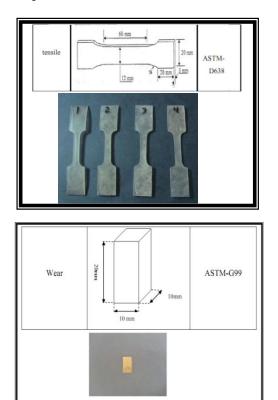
Samples dimensions and photographs of tensile and wear samples.
